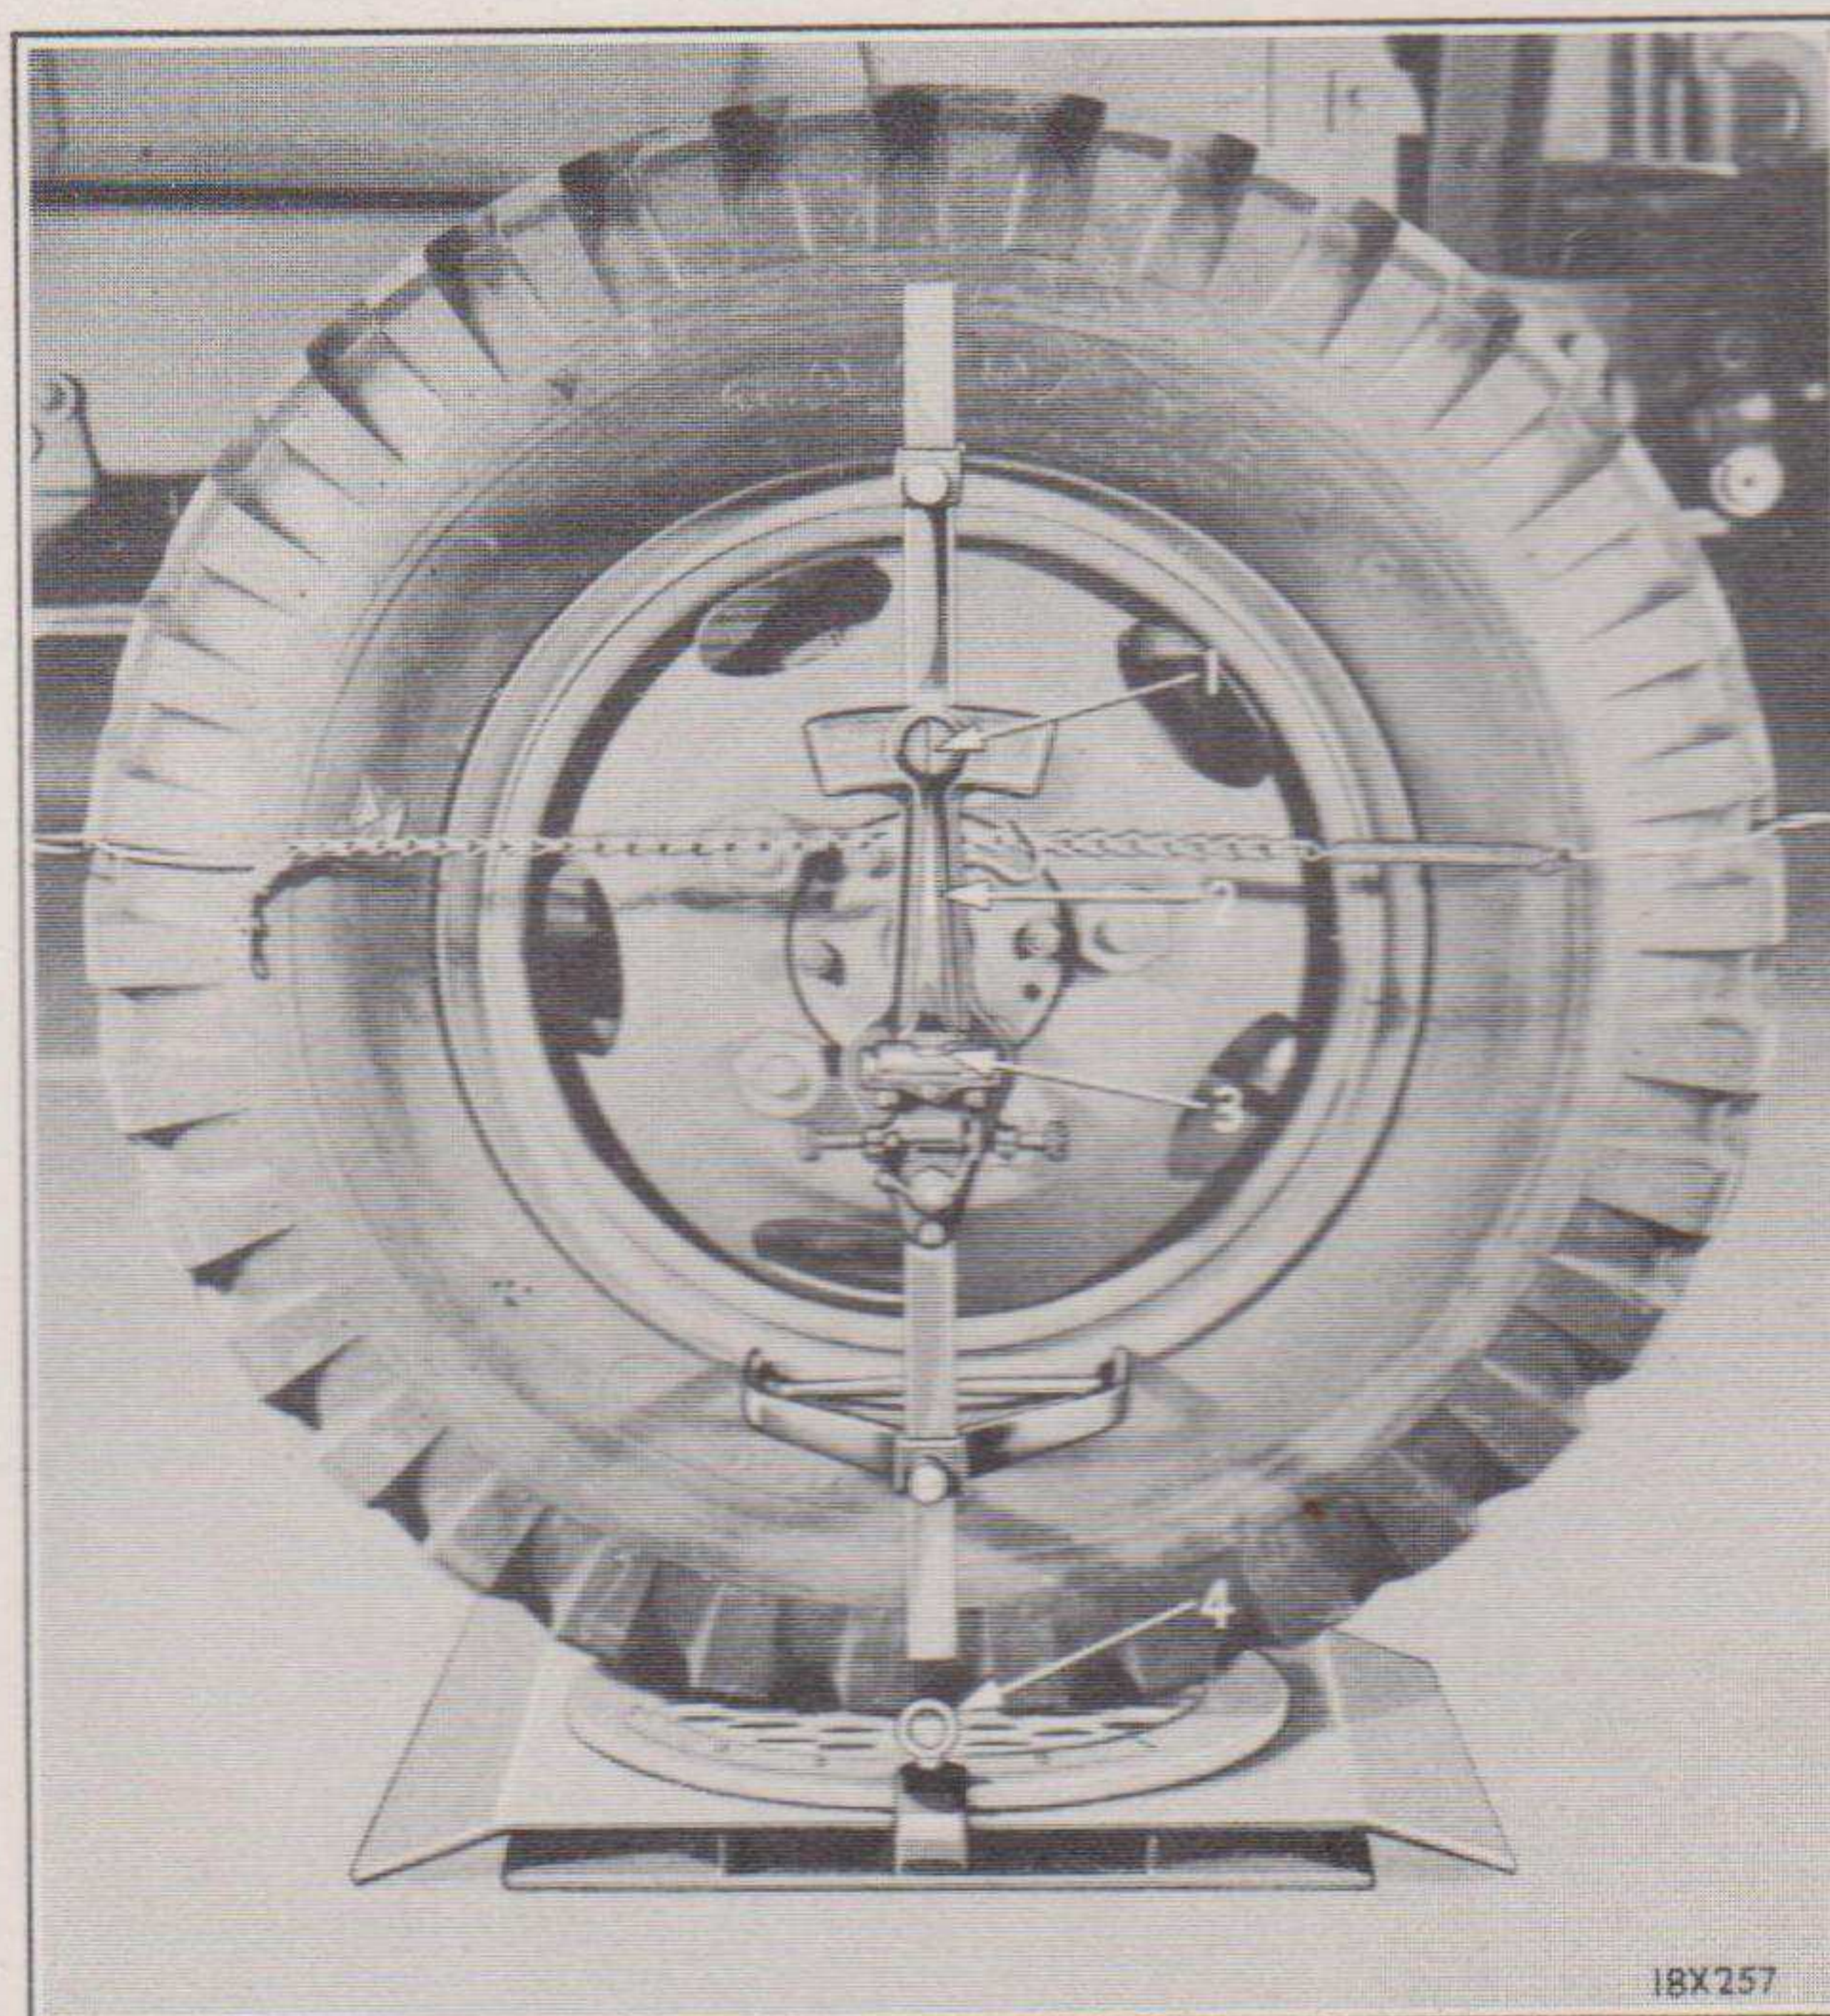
Checking King Pin Angle—Gauge on Right Wheel (Tool DD-428) (Turntables—Tool DD-435)
